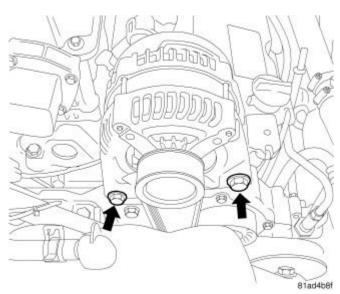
MOUNTING BOLTS Courtesy of CHRYSLER LLC
